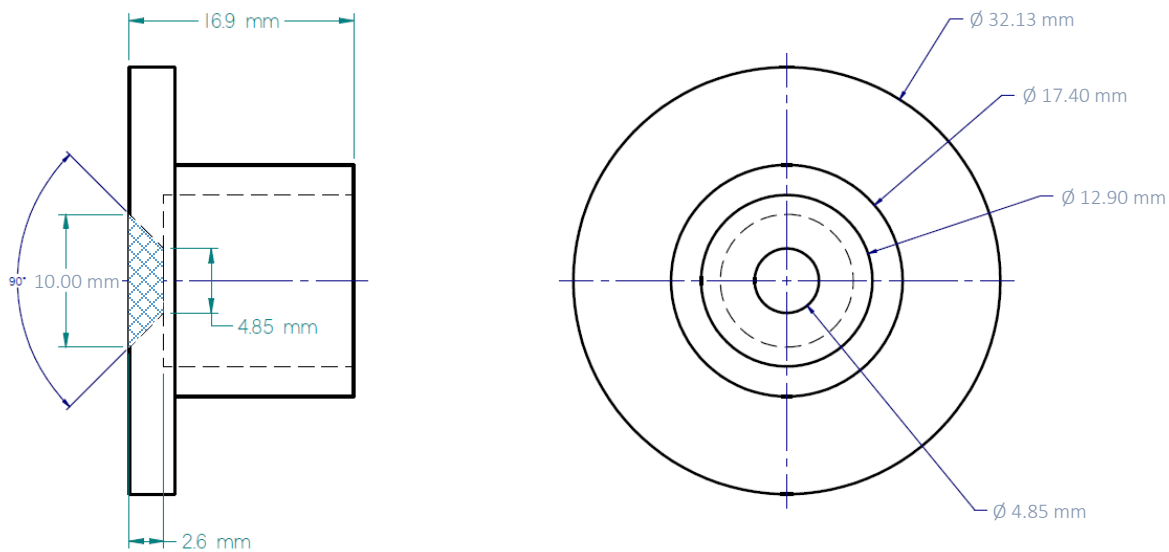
Revision 2 drawing of microphone coupler, 10.00 opening diameter shown. Cross-sectional view (left), backside view (right). Air-Chamber is shown by cross-hatched region.
